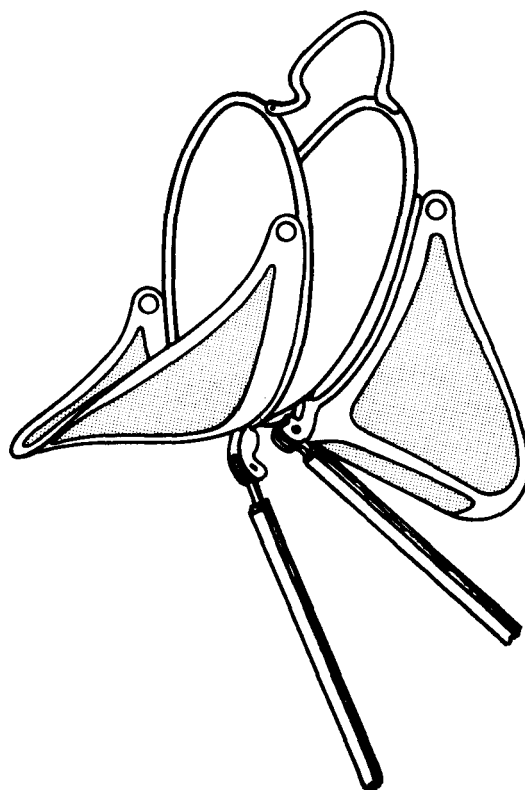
APPEARANCE OF FRAME AFTER BENDING
